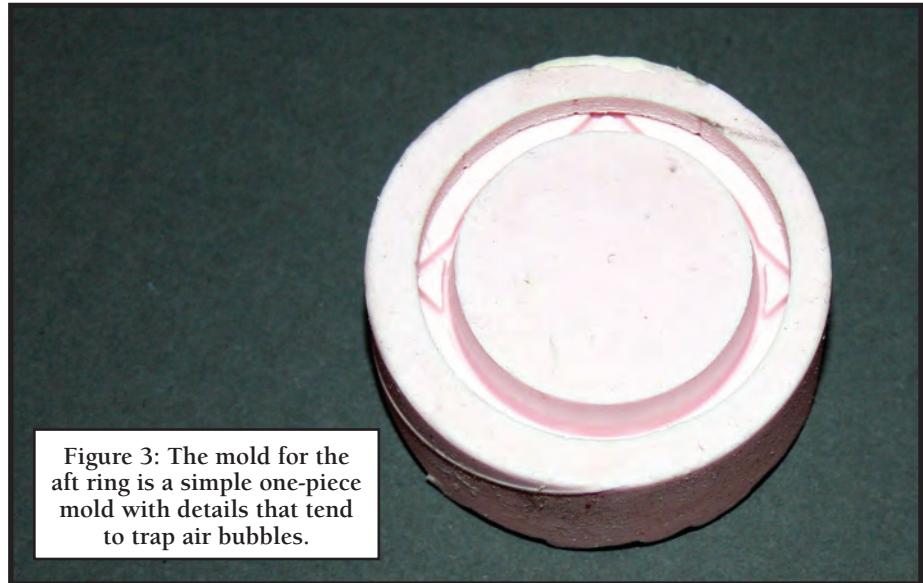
The mold for the aft ring is a simple one-piece mold with details that tend to trap air bubbles.
